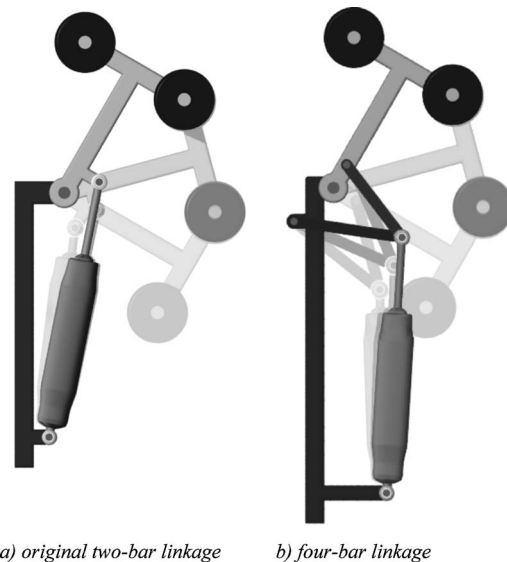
Linkage configurations of (a) the original two-bar design and (b) the modified four-bar design. In both cases the cylinder piston rod is displaced by user actuation of the padded machine arm.
